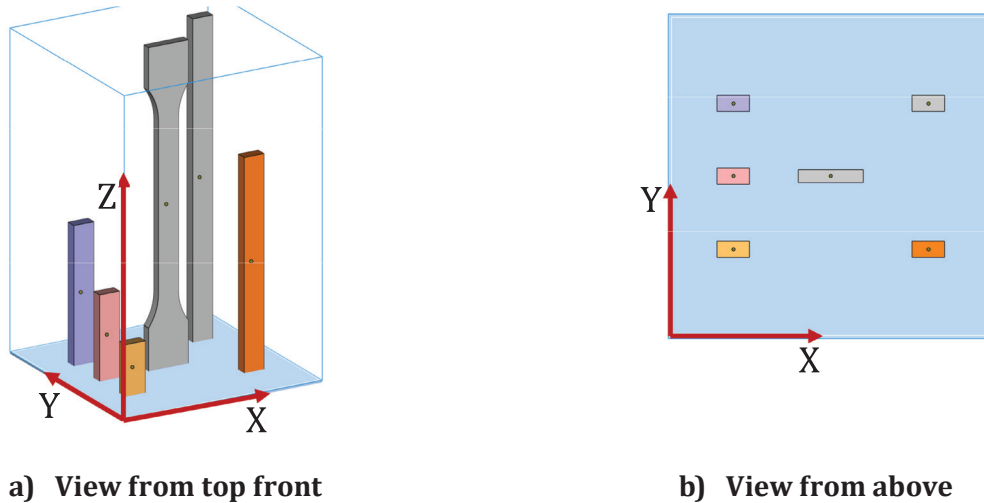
Grid arrangement ZX test specimens during material extrusion
